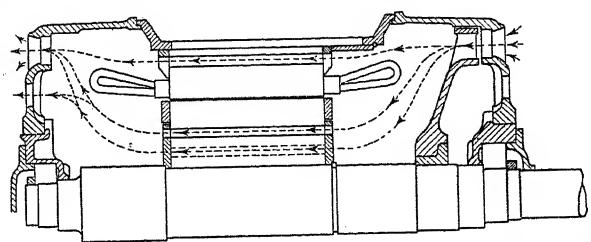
h.p. 960-r.p.m. squirrel-cage motor fitted with propeller-type fan.
